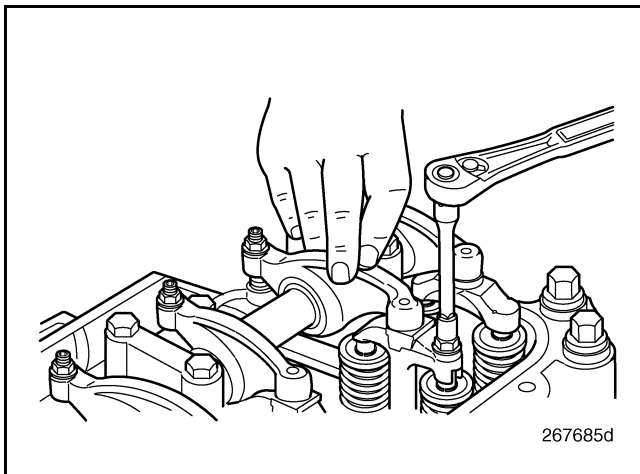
Turning Yoke Adjusting Screw Until It Contacts Valve Stem
